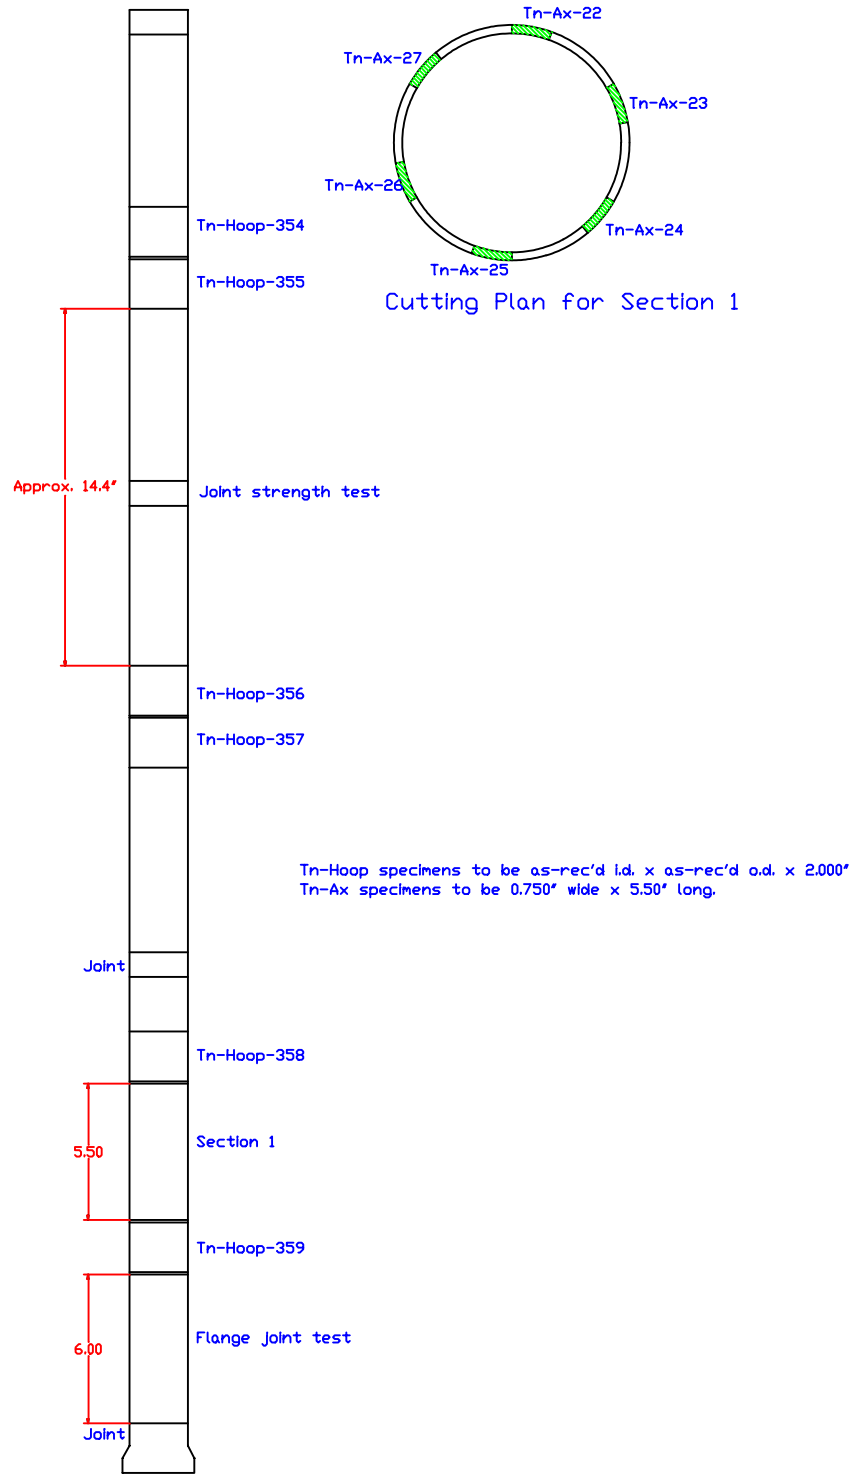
Cutting Plan for Pall Fe₃Al Element 27060
